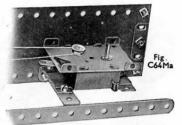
Ma shows how the *Magic* Motor is mounted in position for driving this model.
